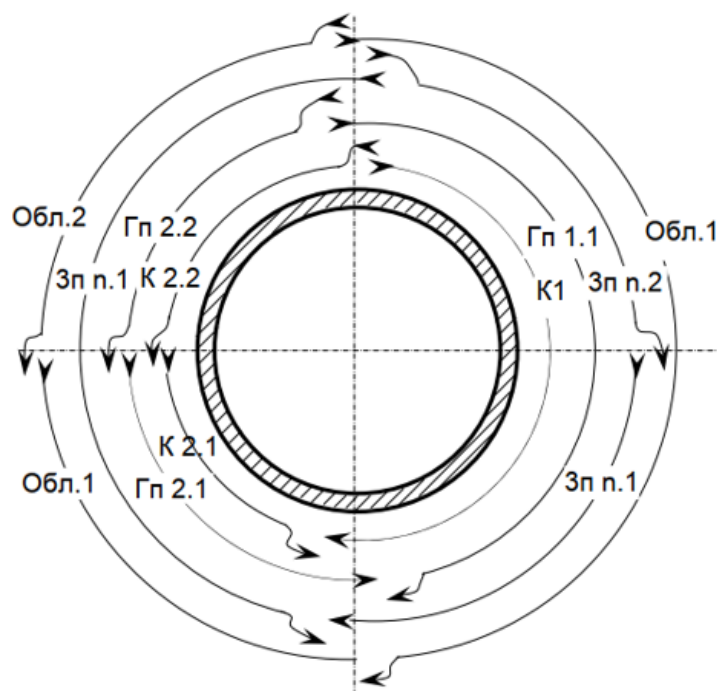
Recommended scheme of automatic one-sided Saturnax welding of nonrotating circular butt joints of pipes
